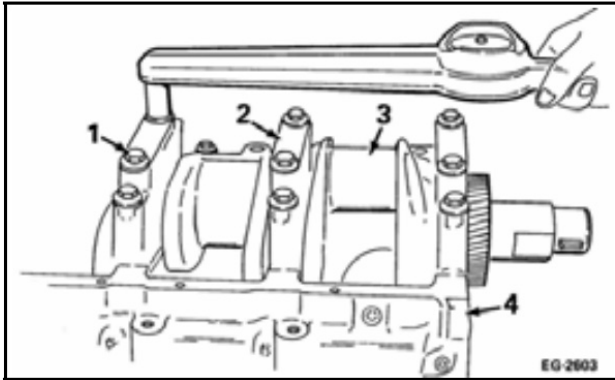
Tightening the Main Bearing Cap Mounting Bolts
